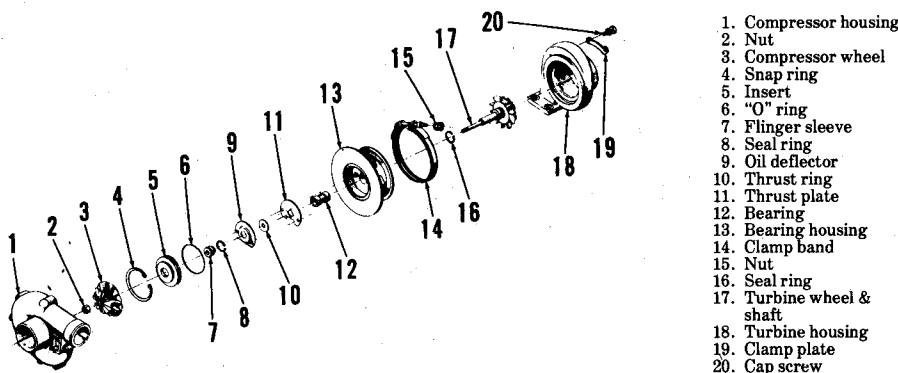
Exploded view of Schwitzer Model 3LD turbocharger used on 9000, 9600, 9700 tractors.
